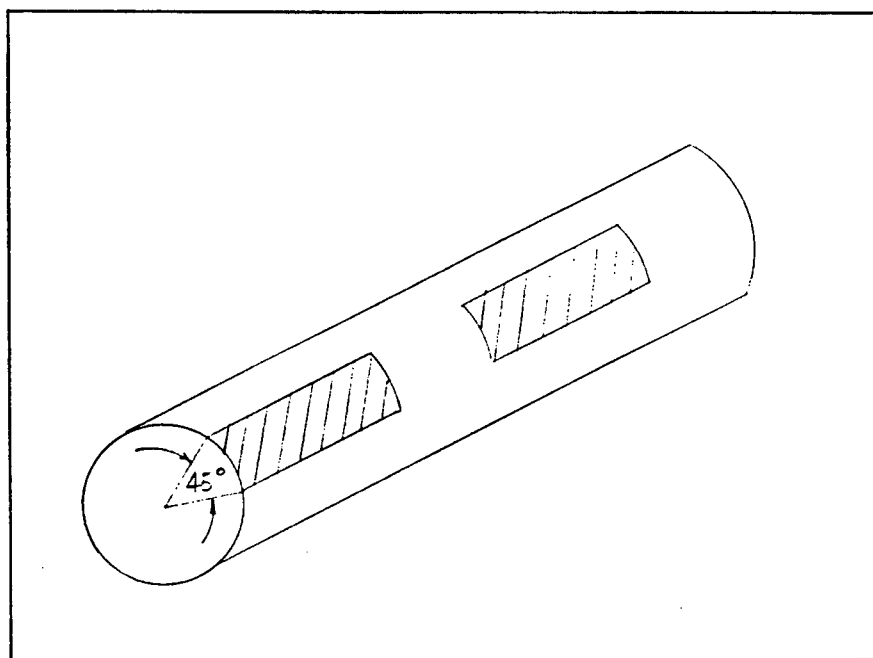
Spot welded tube with 2 spots occupying
